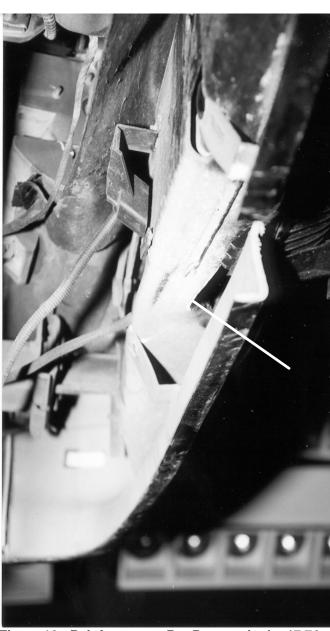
Reinforcement Bar Damage in the 17.74 kph Impact.
